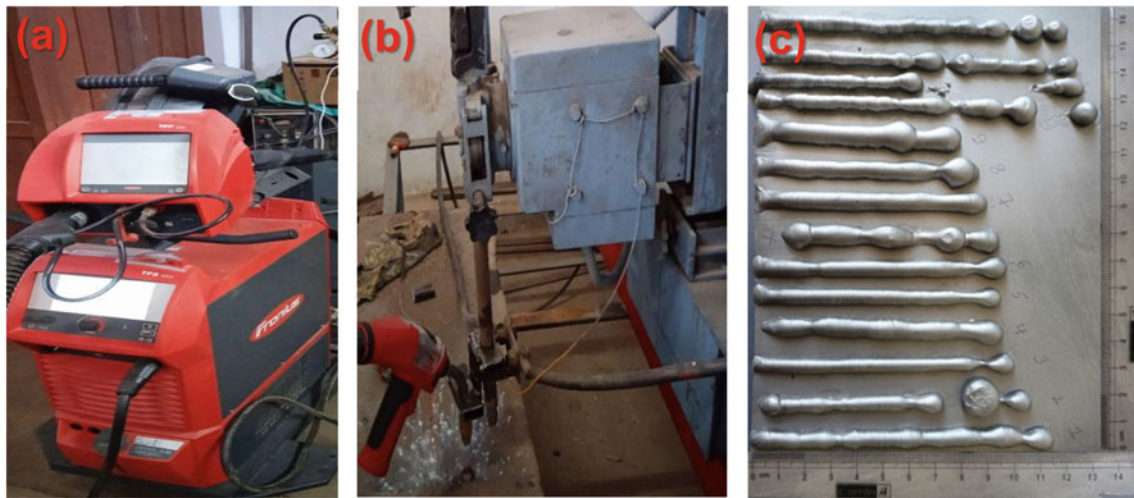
Welding method a setup of CMT machine and b welding gun fixed to X-Y gantry table c deposited beads
